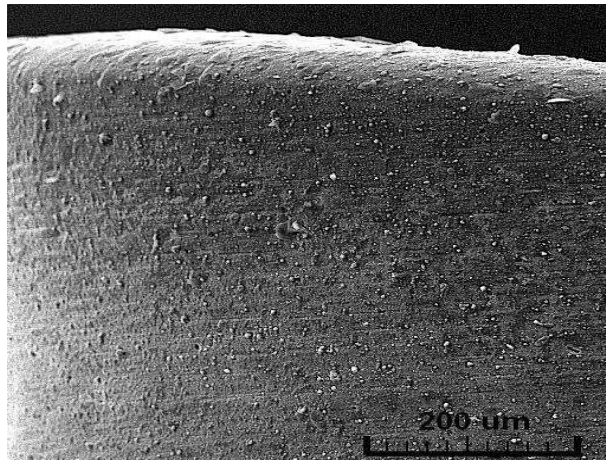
REM image of cutting edge before hard milling (exp. 250x).
